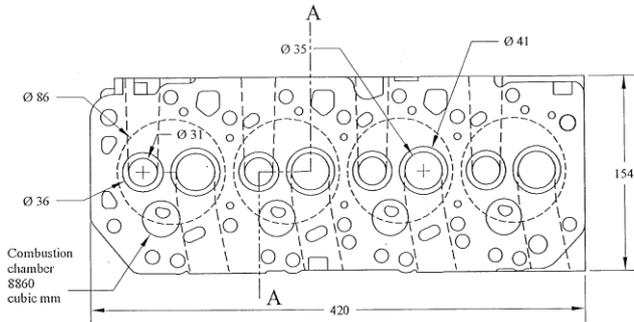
The lower view of 1974cc Gray Cast Iron Alloy Engine head with the exhaust and Inlet Passage
